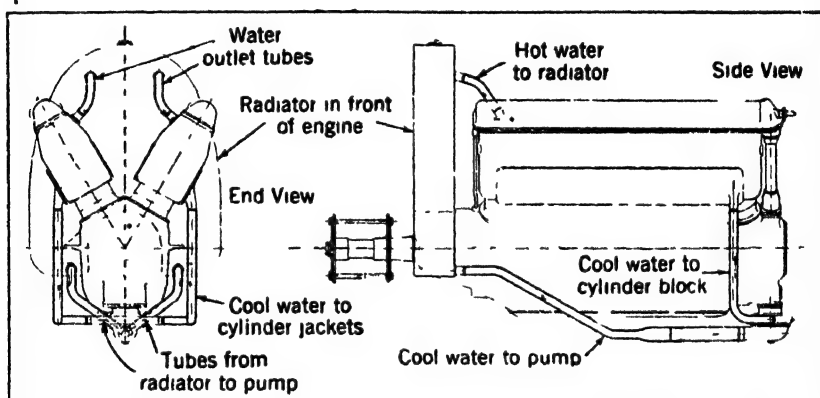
Water-Cooled System Showing Simple Piping When Block Castings are Used for Cylinders. Radiator Mounted in Front of the Engine.
